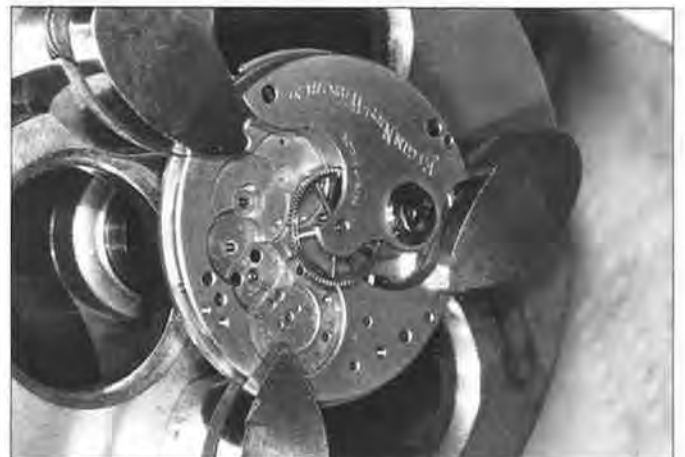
The wheel was tested for fit while mounted in the faceplate.
